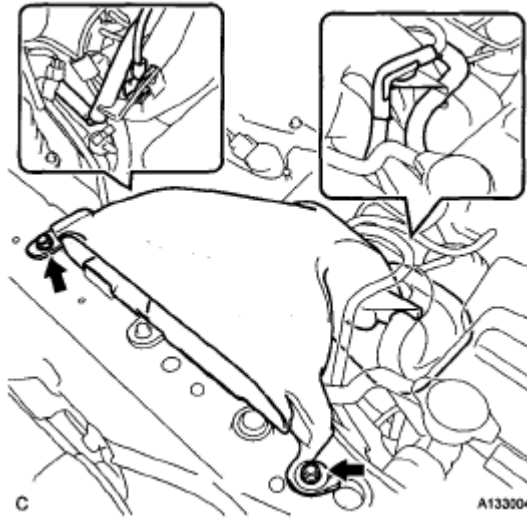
Identifying No. 2 Air Cleaner Inlet Bolts & Clamps
